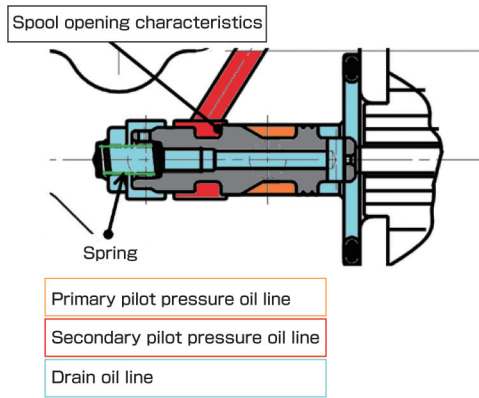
Pressure-reducing valve with different spool diameters (no sleeve)
